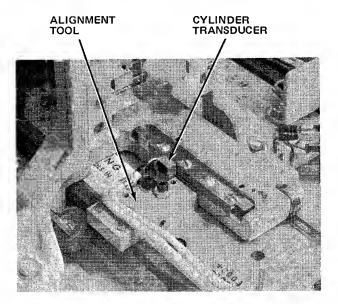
Cylinder Transducer Alignment Tool Installation
